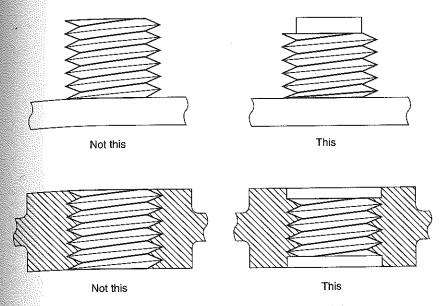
Screw threads should not extend to the ends of the threaded element.
